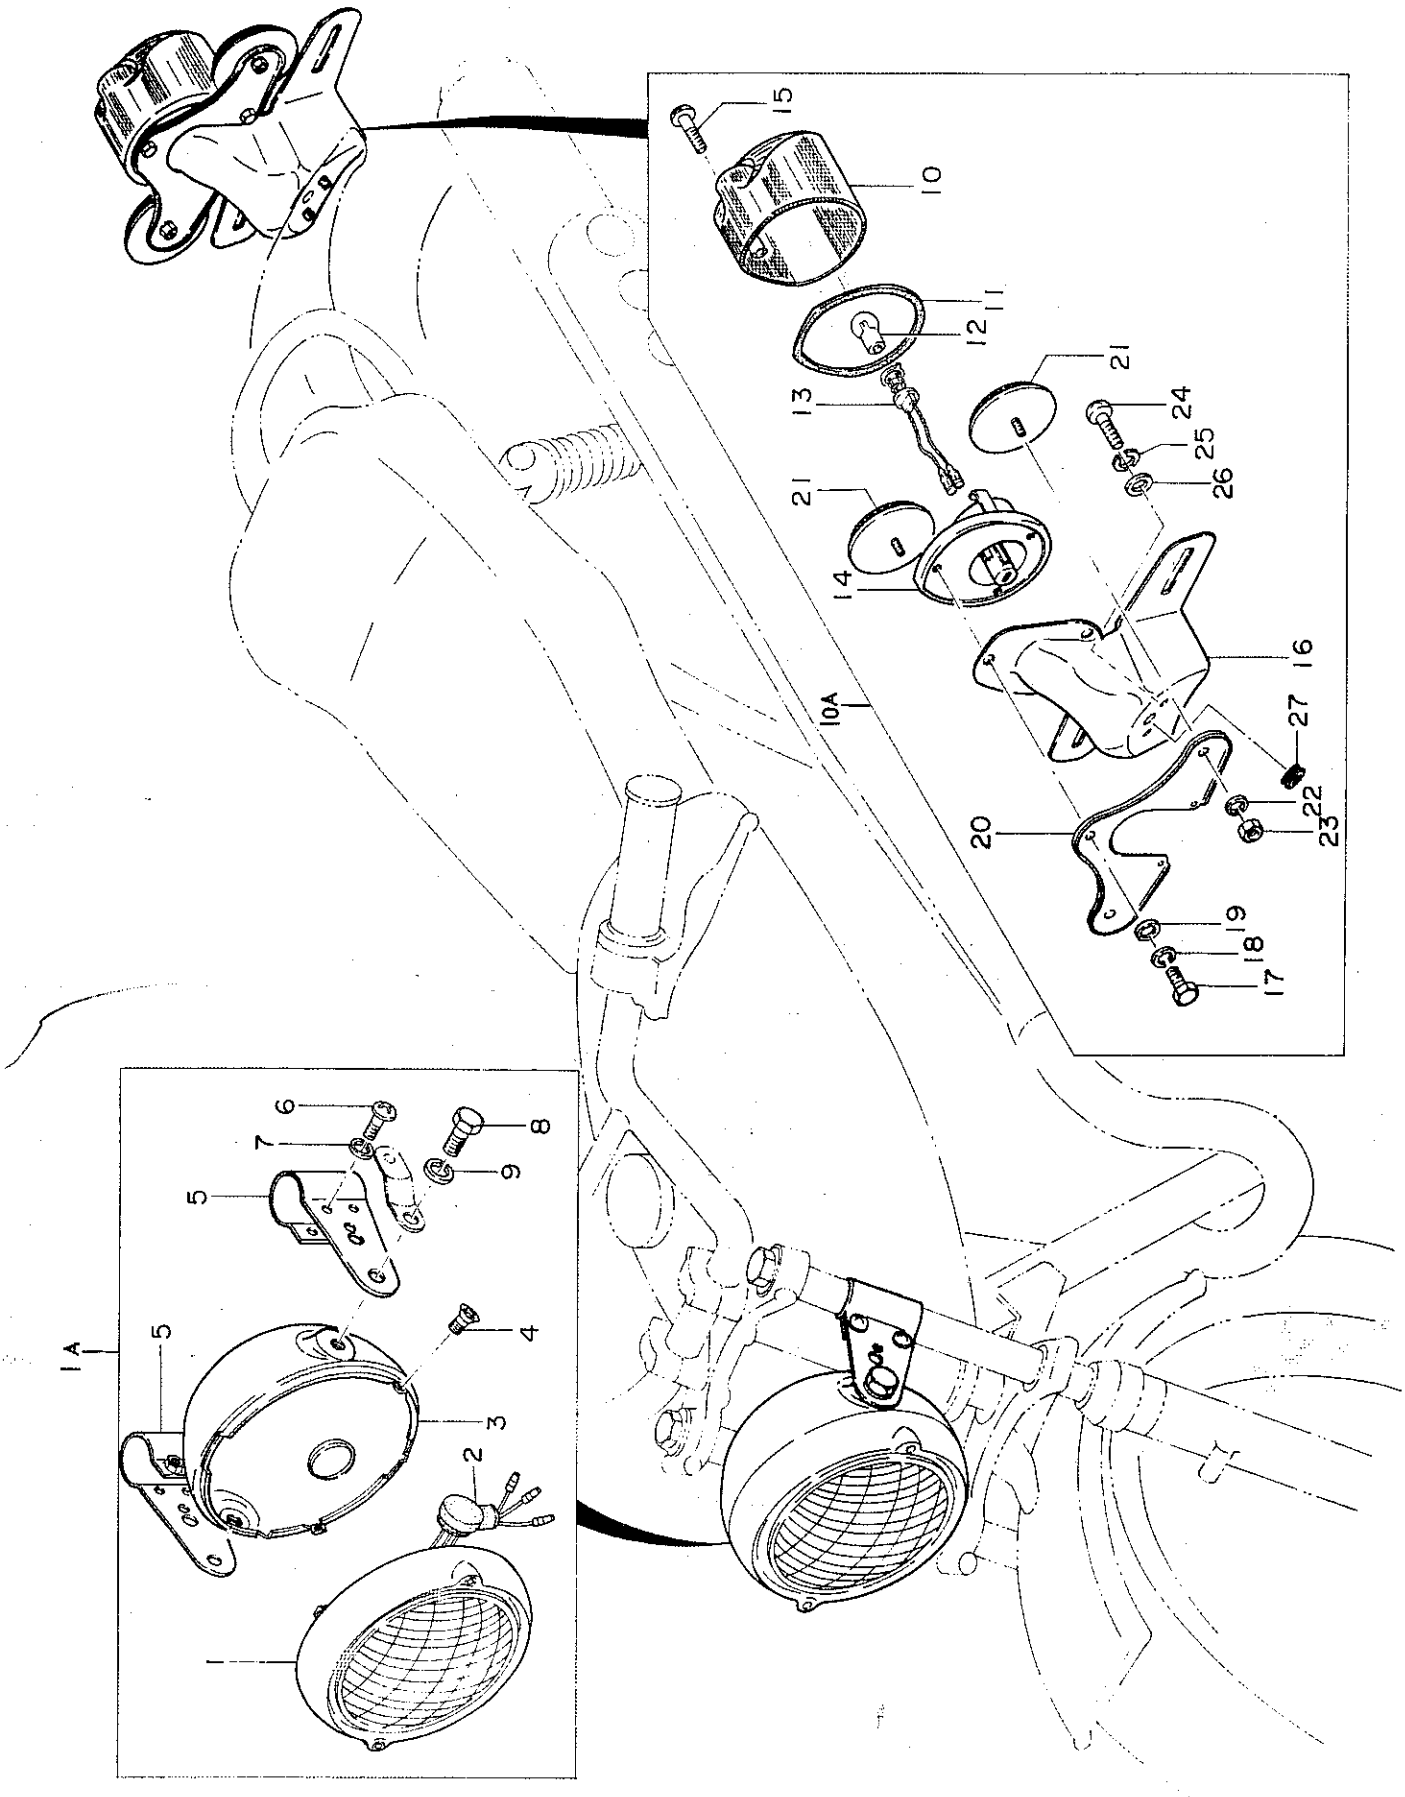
HEAD LAMP AND TAIL LAMP
